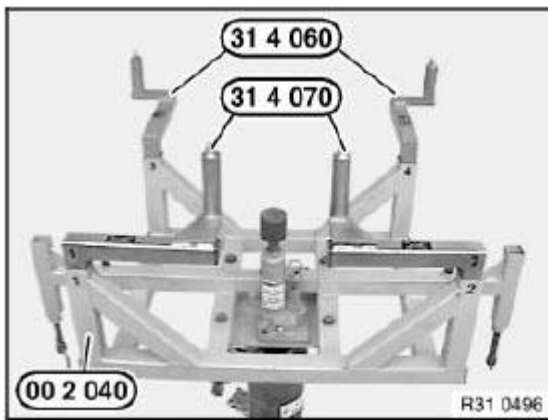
Identifying Special Tool (31 4 060), (31 4 070) And (00 2 040)
